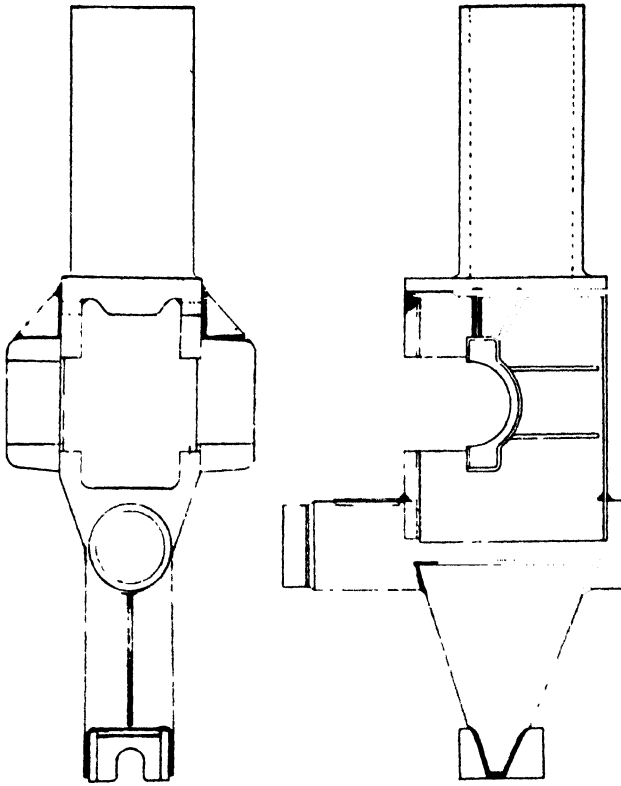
Line drawing indicating the general features of the welded swivel or front and sub-assembly. In addition to increased strength, the appearance is much improved.
